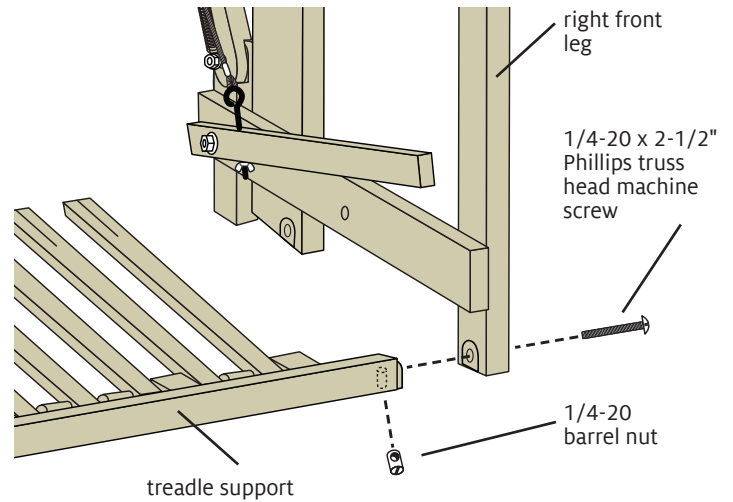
INSTALL THE TREADLE ASSEMBLY
